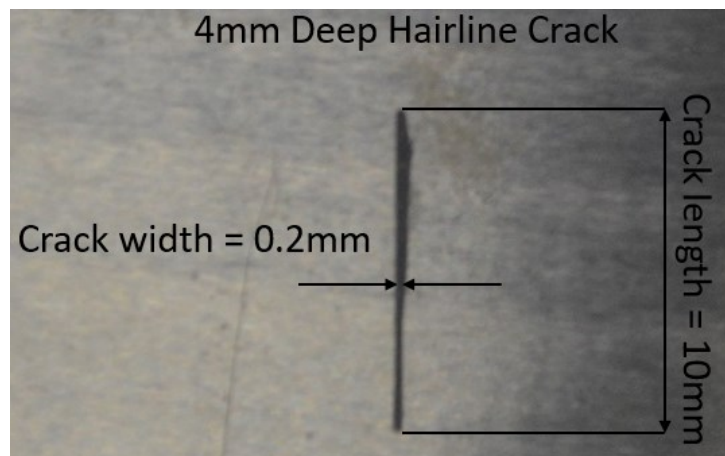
A 4 mm deep rectangular shaped hairline crack (40 % wall loss) present on a 10 mm thick low carbon steel plate (crack width = 0.2 mm and crack length = 10 mm).
